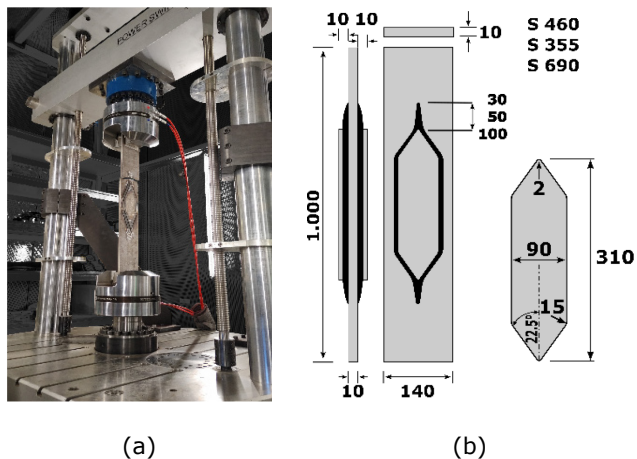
Test rig (a) and dimensions of the specimens of the small-scale tests, all dimensions in mm.
